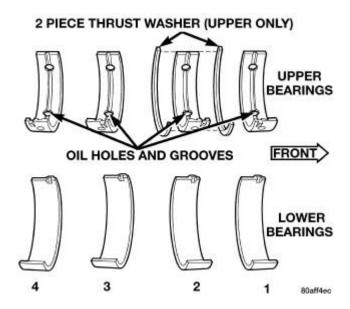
Main Bearing Identification Courtesy of CHRYSLER LLC
